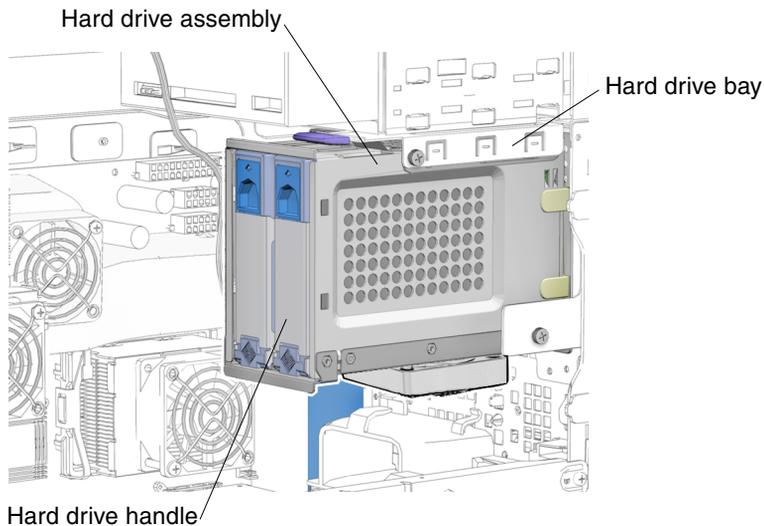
Installing the Hard Drive in the Hard Drive Assembly
